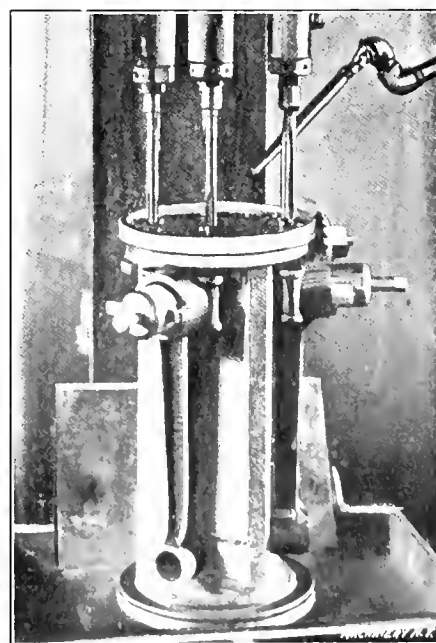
Drilling, Reaming and Finish Reaming Cup screw Holes
